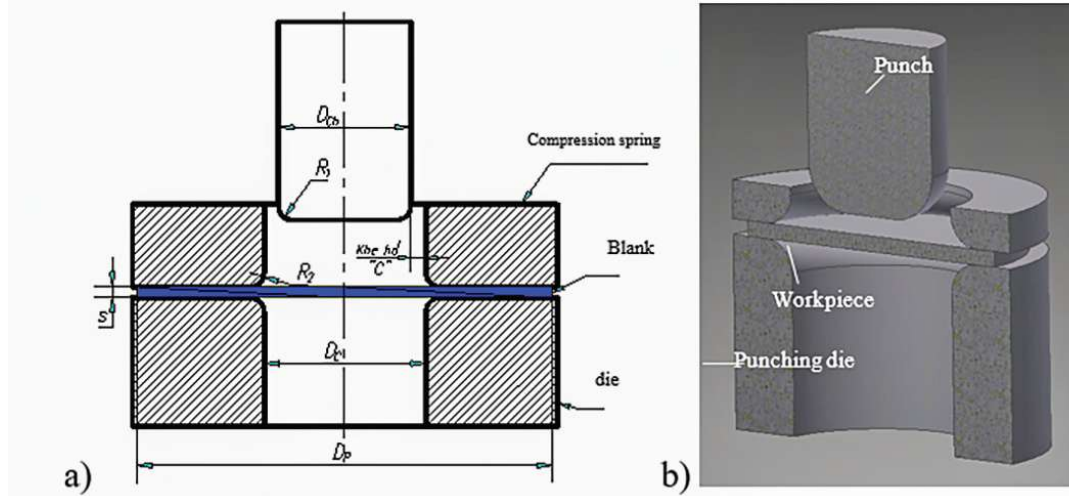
Schematic of the micro deep drawing process (a) and the 3D model (b).
